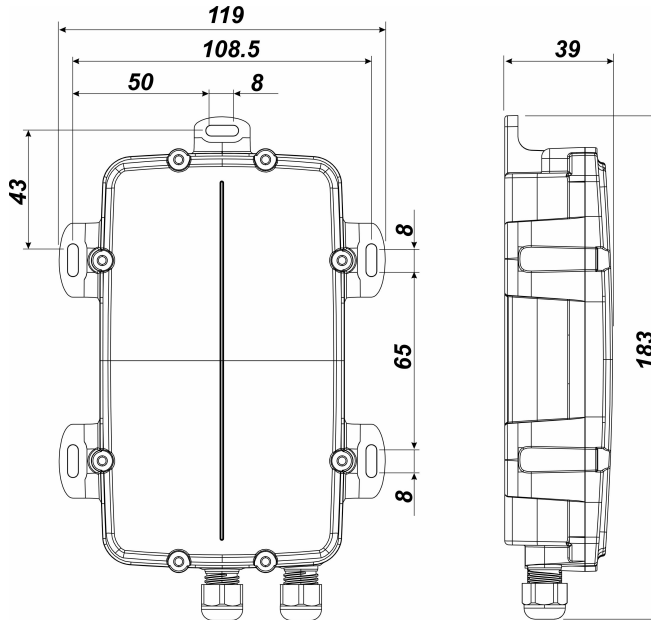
Labcom 221 GPS measurement drawing and installation dimensions (mm)
